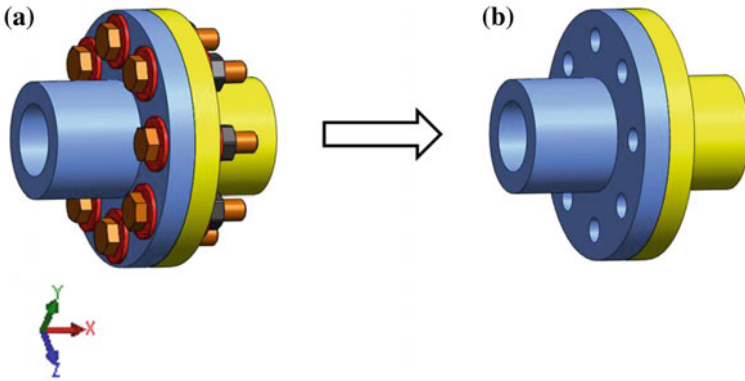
Assembly CAD model: a initial model, and b simplified model
